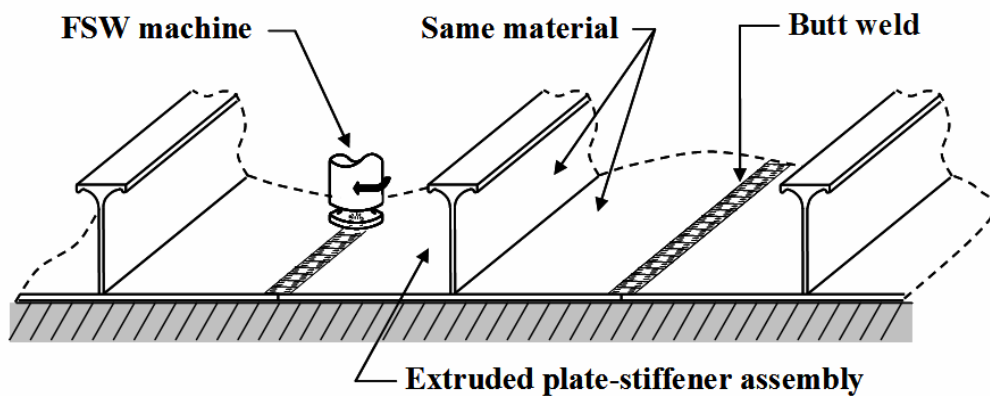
(b) Schematic of FSW for butt-joining between large extrusions only (Method B)
